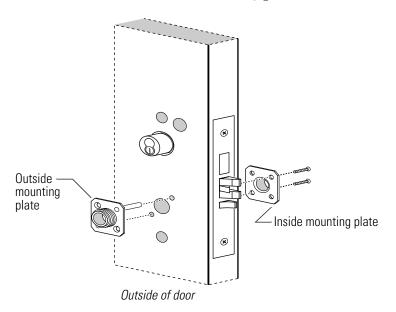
Removing and reinstalling the mounting plates (B.A.S.I.S. Lock shown)
